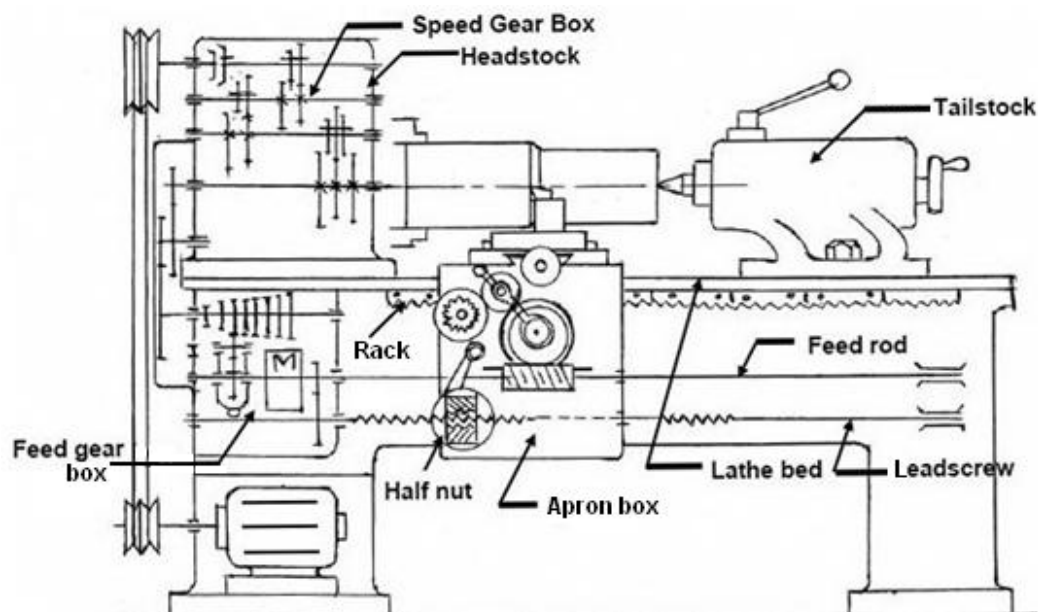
schematically shows the kinematic system of a 12 speed centre lathe.
